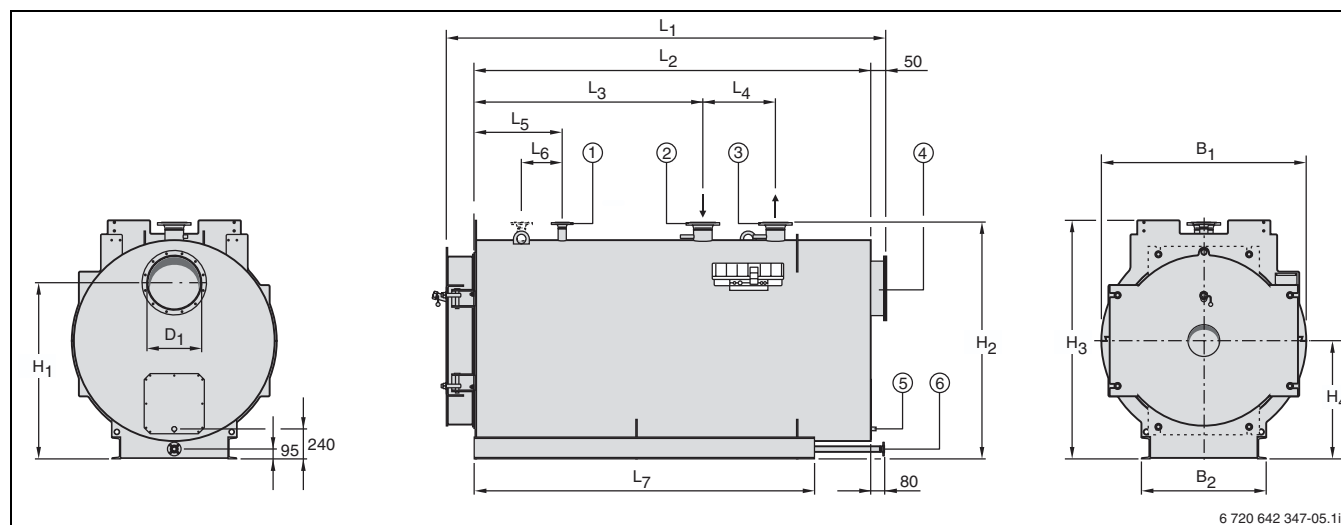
Dimensions Logano S825L, boiler sizes 650 to 5200 (dim. in mm)
